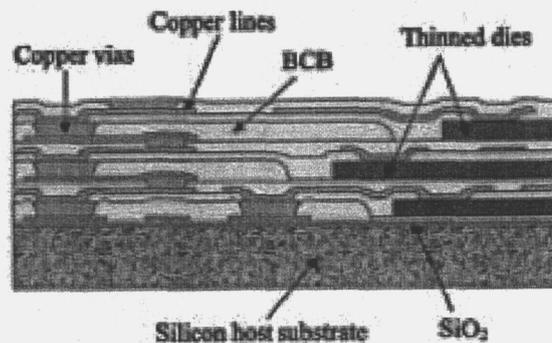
Illustration of IMEC 3D Packaging. [Pinel.pdf]
